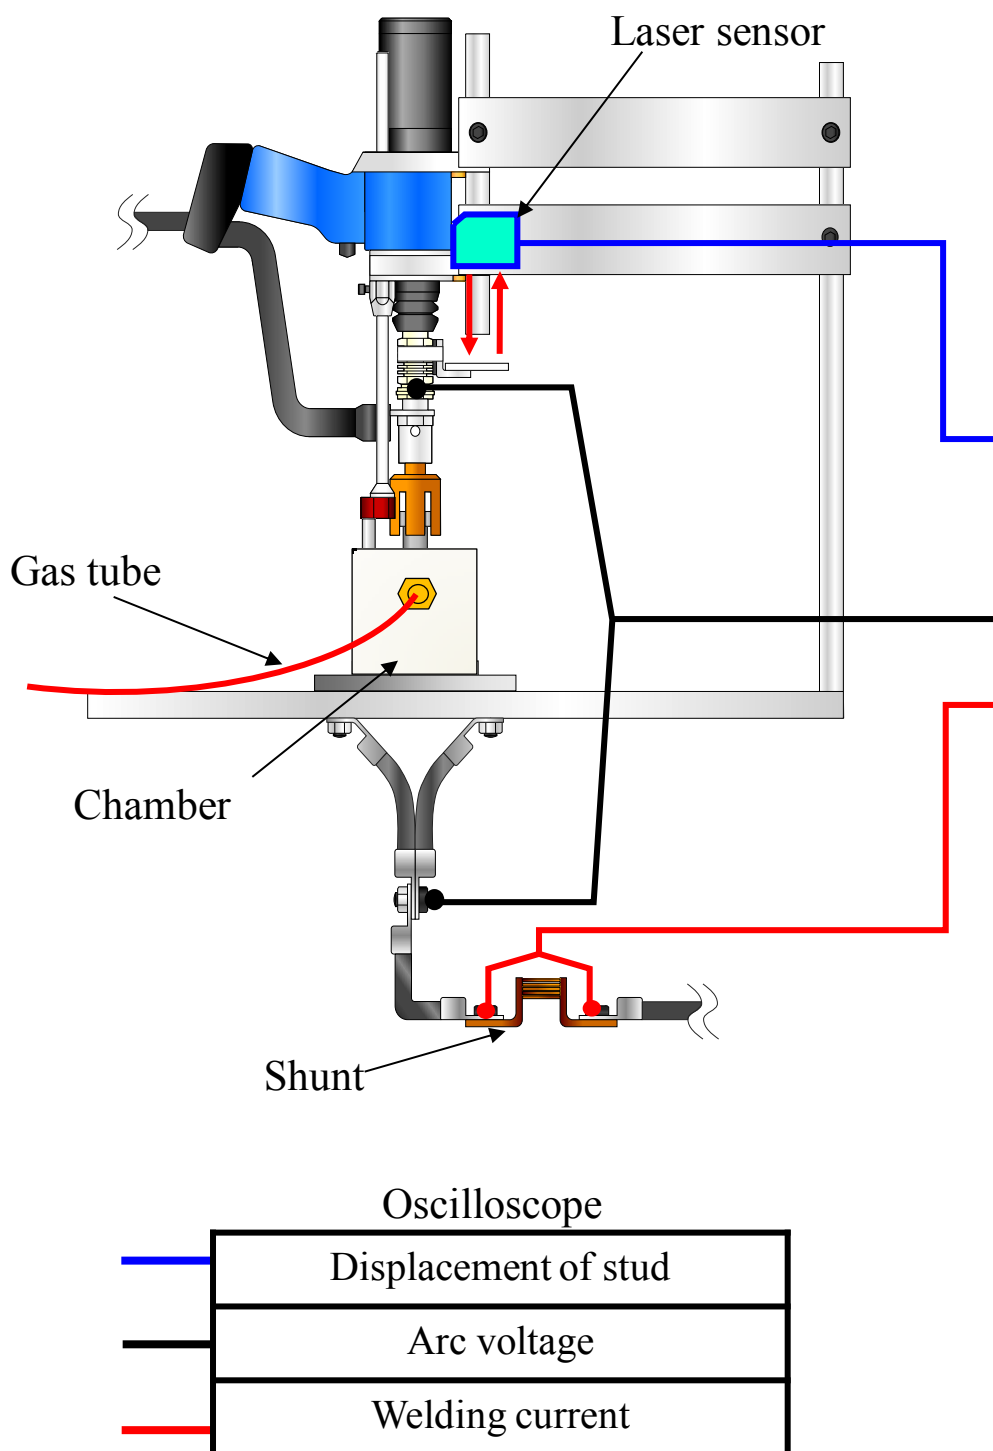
5 Experimental equipment of stud welding equipped container for argon shielding
